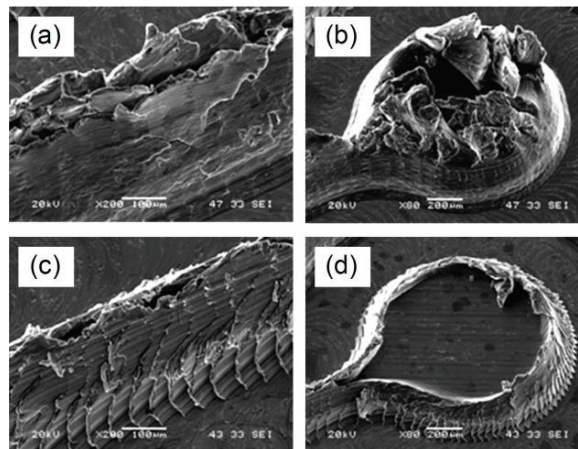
Effect of milling direction (15° tapered tool, before finish face milling pass) (a), (b) Down milling (c), (d) Up milling. Down milling is seen to produce more severe top/side burrs.
